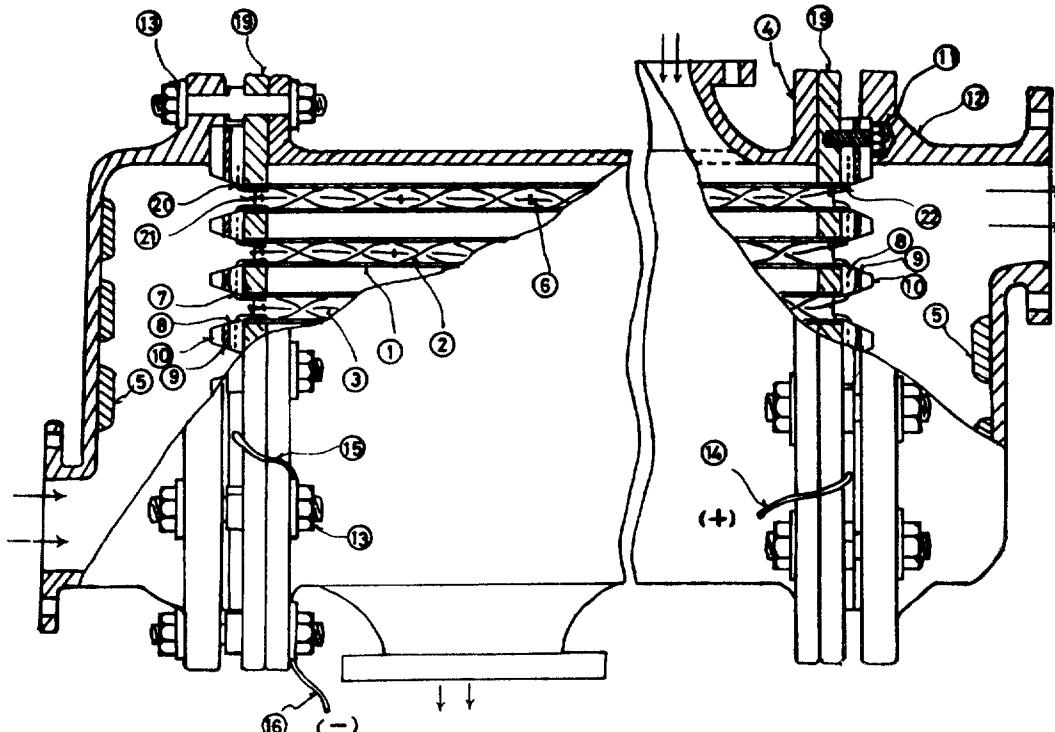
A Section View of the Heat Exchanger equipped with the Direct Protective Device for Inner Surface of Cooling Tubes.
